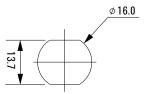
N1254A-501 HV jack - HV jack Adapter, mounting hole, in mm
